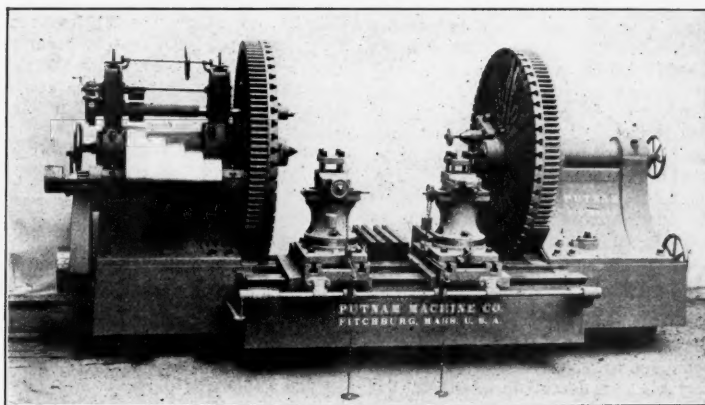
Putnam Machine Company's 92-in. Wheel Lathe.
